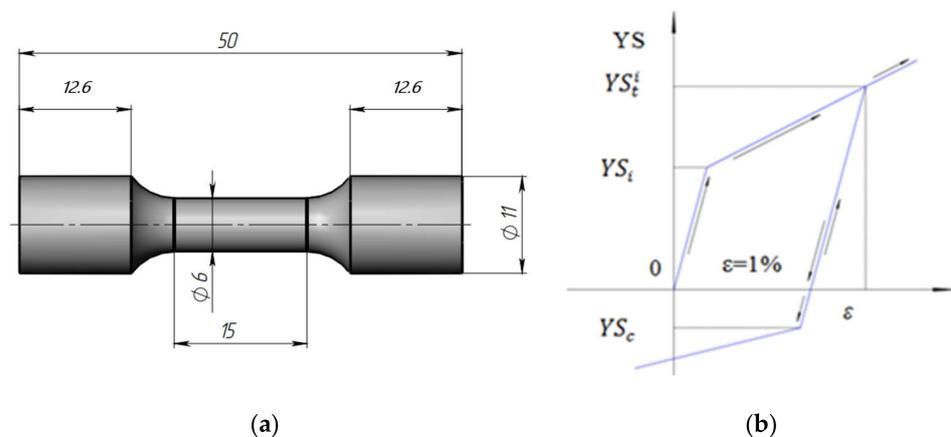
Sample view and dimensions for tension–compression (a) and loading scheme (b).
